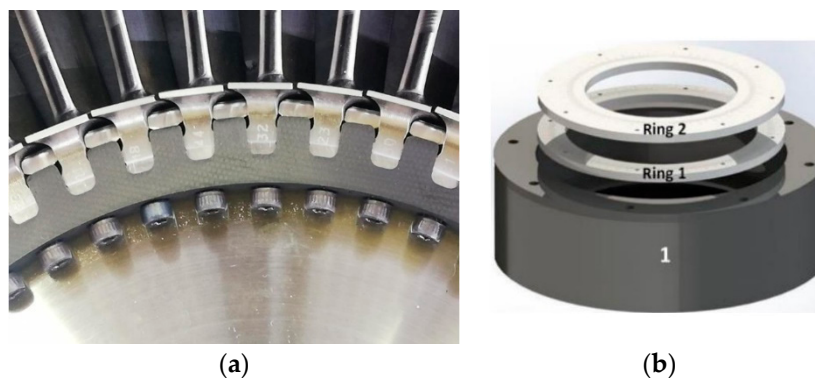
(a) Shows 3D-printed retainer ring; (b) CAD drawing of spinning test rig.
